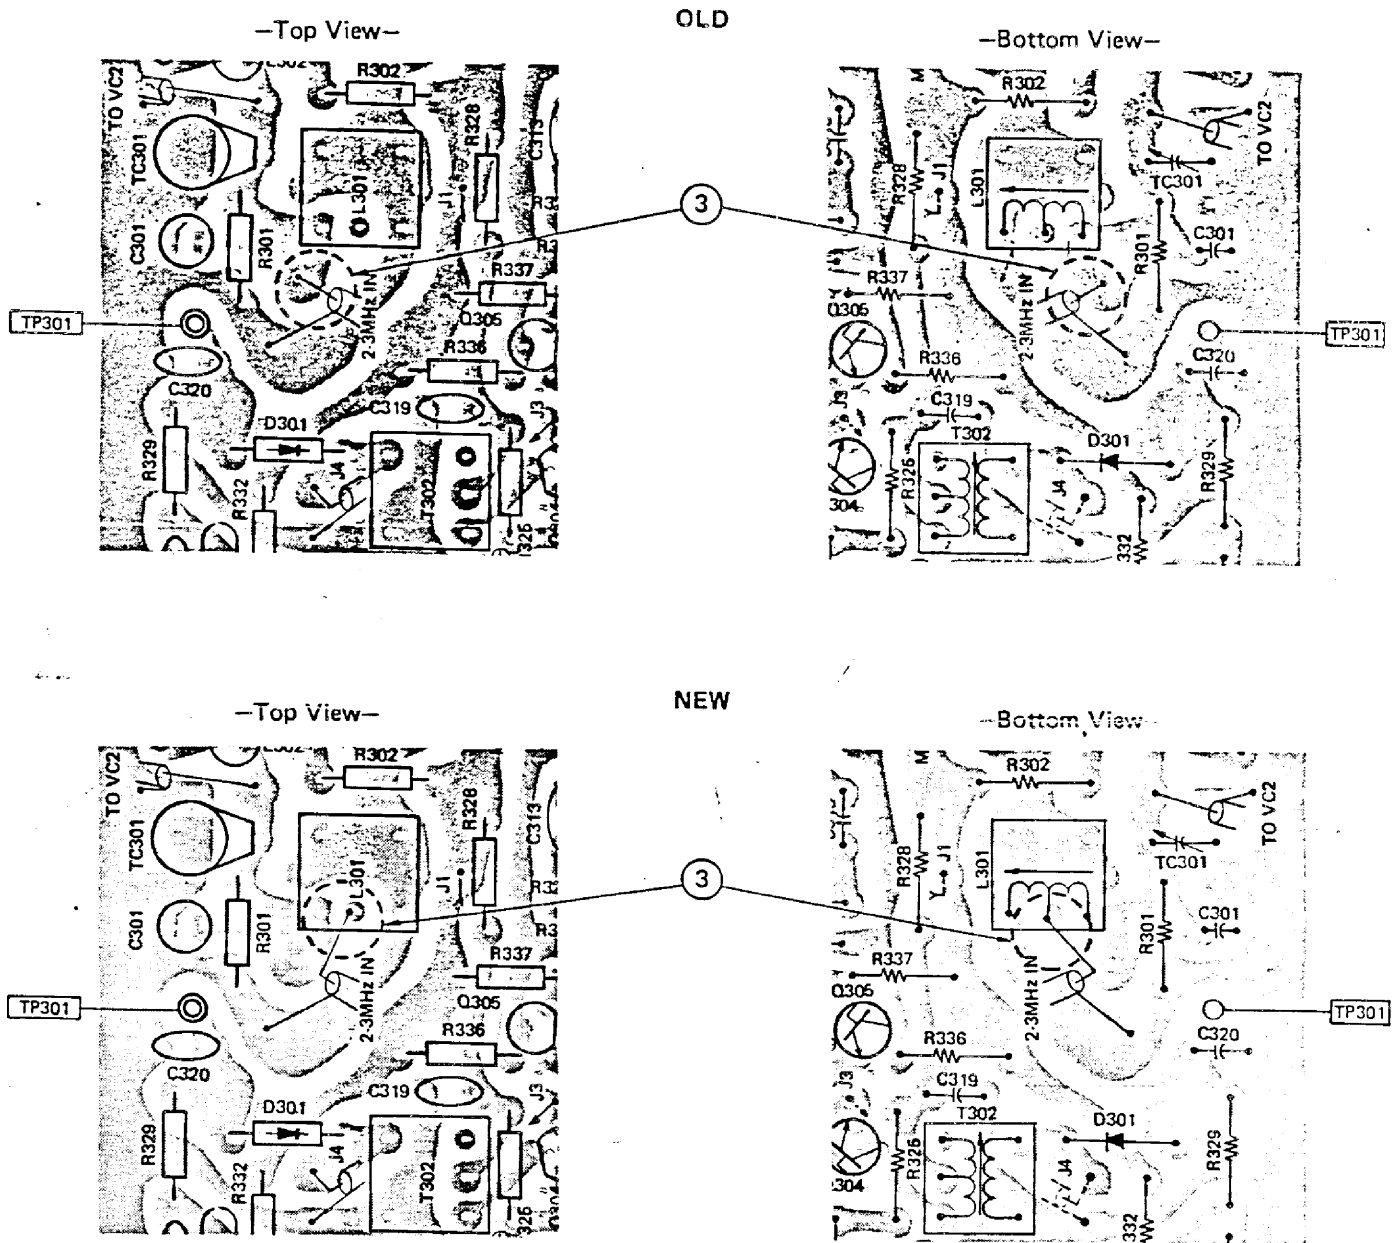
IF/AF P.C.BOARD PARTS LOCATION
